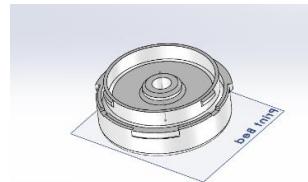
Testing version modification to link 1. This is to hold the custom protractor in place
